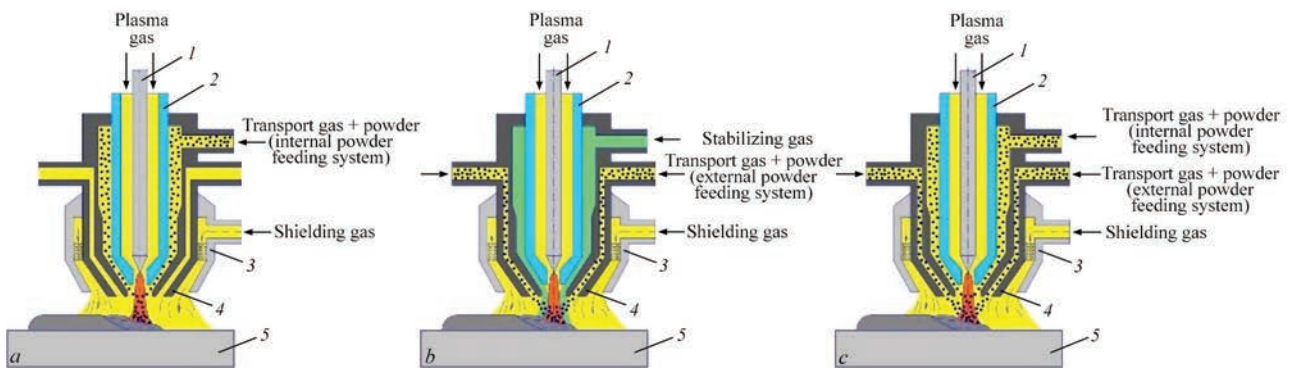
Scheme of PTA torch nozzle part with different variants of powder feeding into the arc: *a* — internal; *b* — external with stabilizing gas; *c* — combined (internal + external); 1 — electrode; 2 — plasma nozzle; 3 — shielding nozzle; 4 — focusing nozzle; 5 — part
